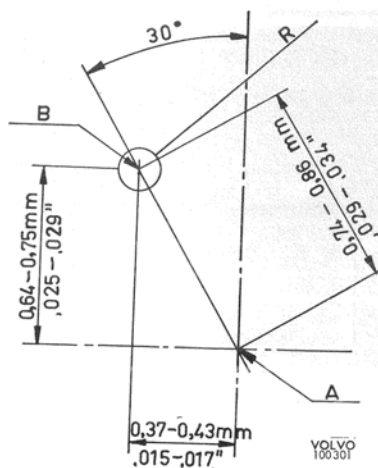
Eccentricity for rear lining (bonded type) for front wheels
